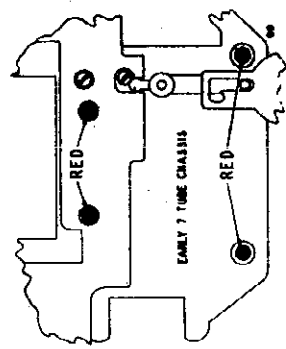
Location of 4 Red Mounting Bolts in Early Models
